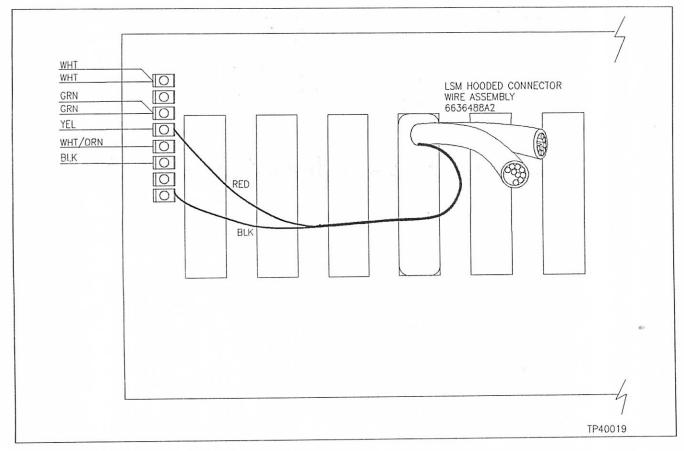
Module Mounting Unit - Back View Wiring Connections
